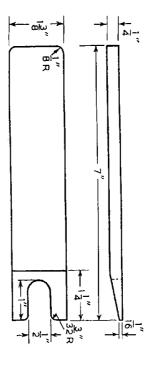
Tool for Removing Sprockets from Magneto and Dynamo.
